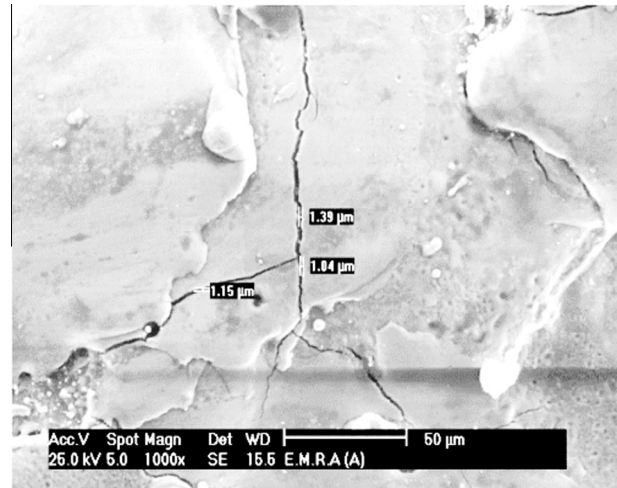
Surface cracks of DIN 1.2379 rough machining using Dura graphite 11 electrode.
